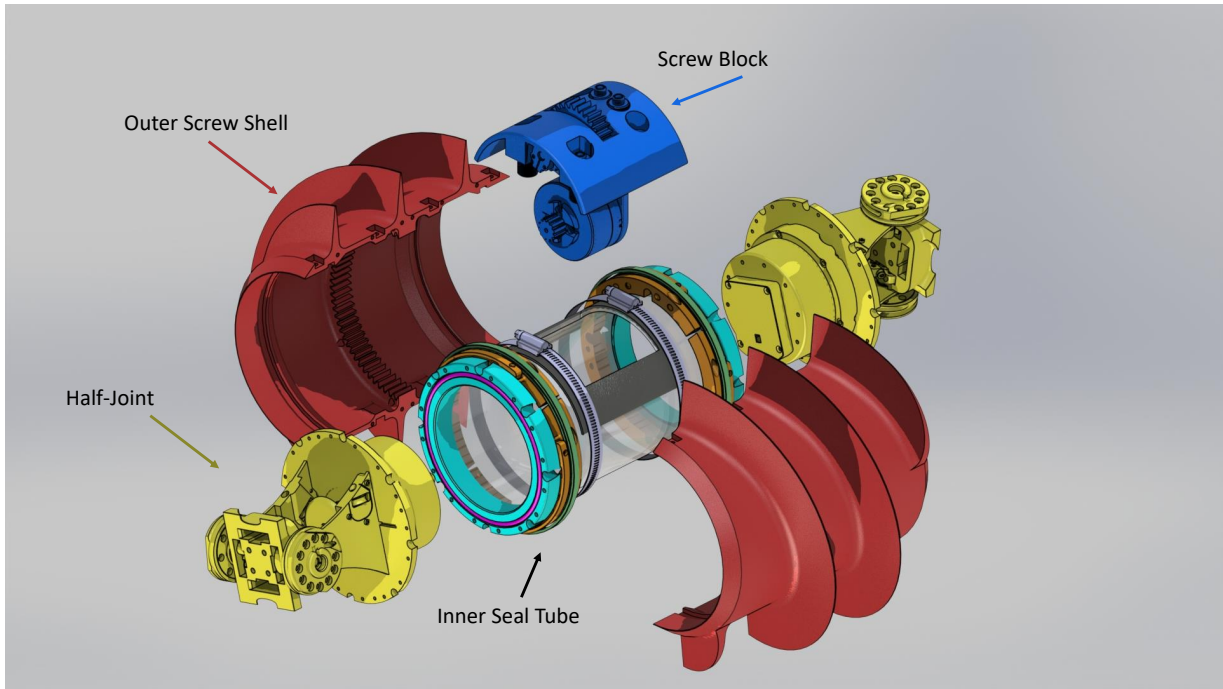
An exploded view of the CAD model for a segment of ARCSnake V2.
